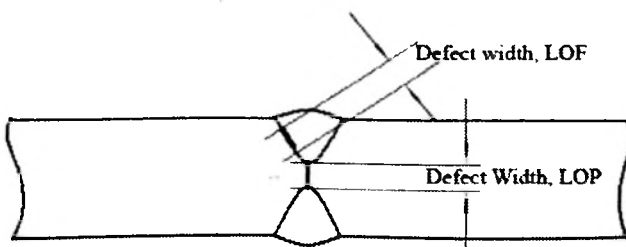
Definition of defect width in case of Lack of Penetration (LOP) and Lack of Fusion (LOF) defects in butt weld.
